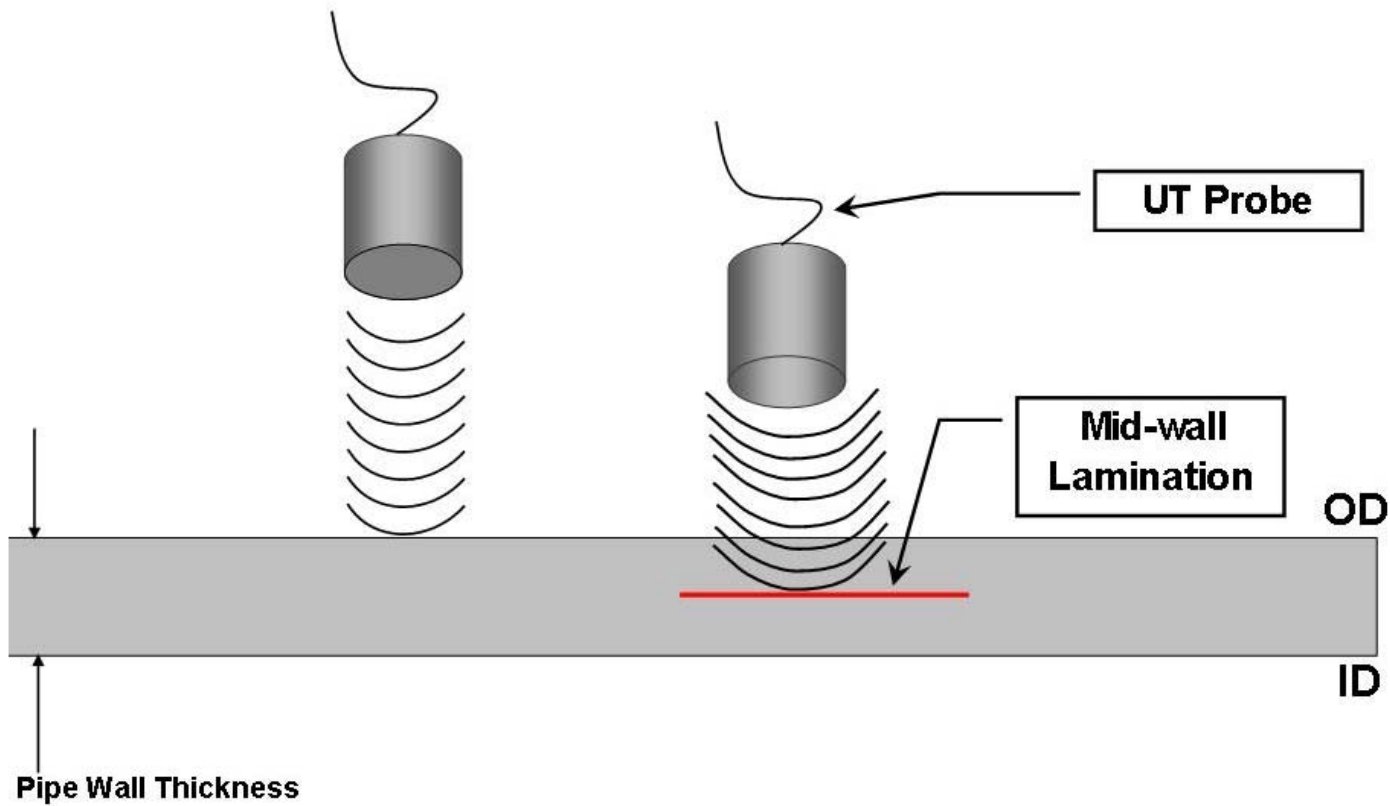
Principle of Lamination Detection and Wall Thickness Measurement
